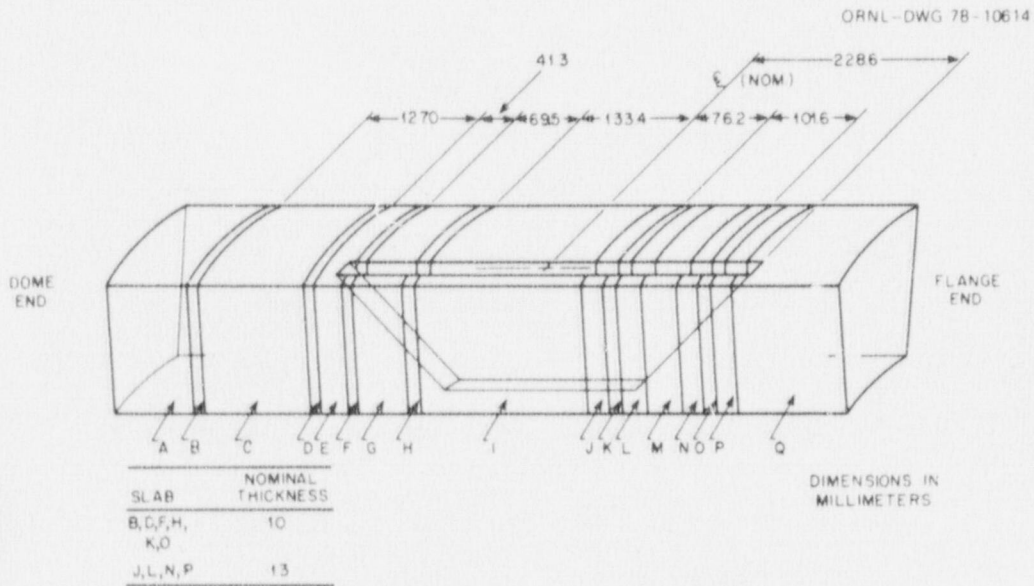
Block cut from intermediate test vessel V-7B containing entire repair weld and fracture zone. Slabs A through Q were cut after all ultrasonic examinations were completed.
